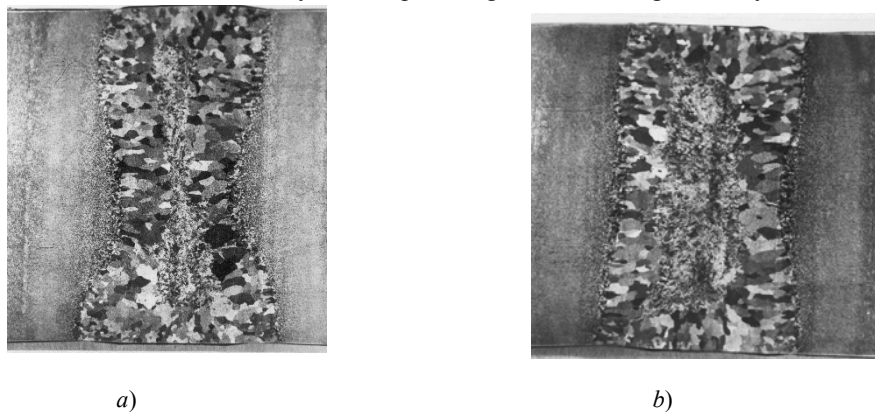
Macrostructure of electroslag weld joint made according to standard technology (a) and under impact of magnetic field (b), $\times 100$
